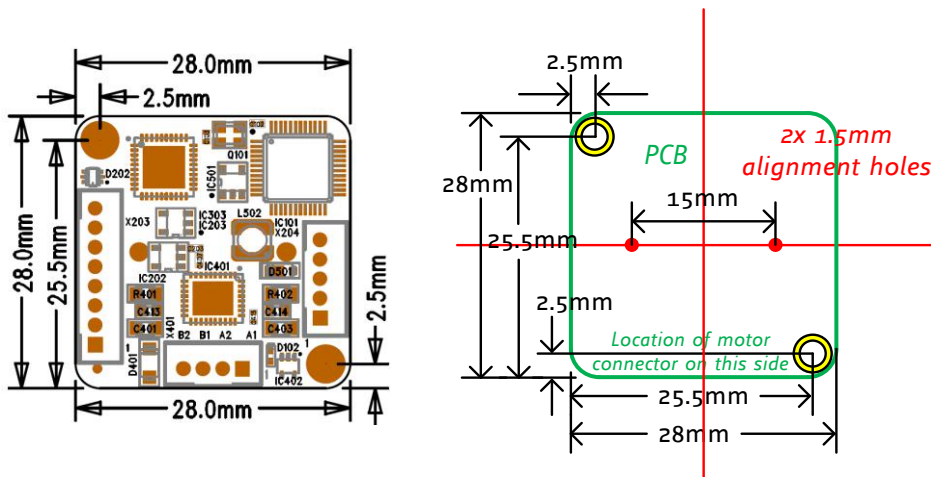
Dimensions of TCM-1321-DT, position of alignment and mounting holes
